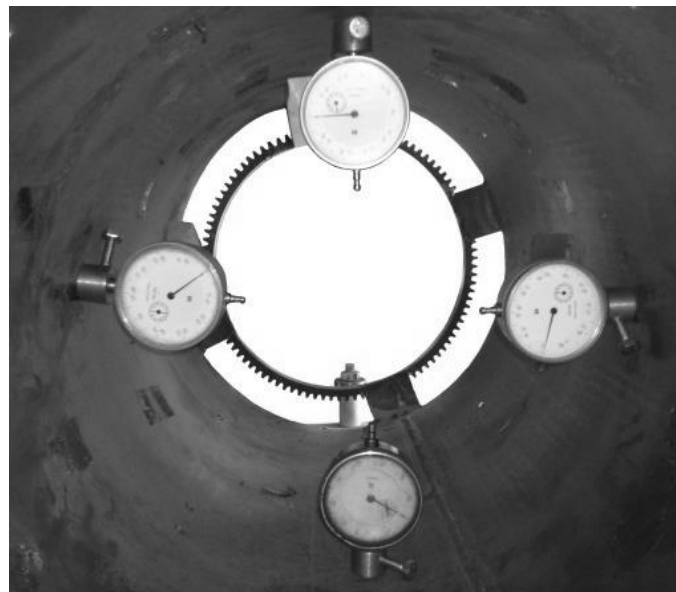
Location of clock-type indicators inside the drum of lifting machine model
